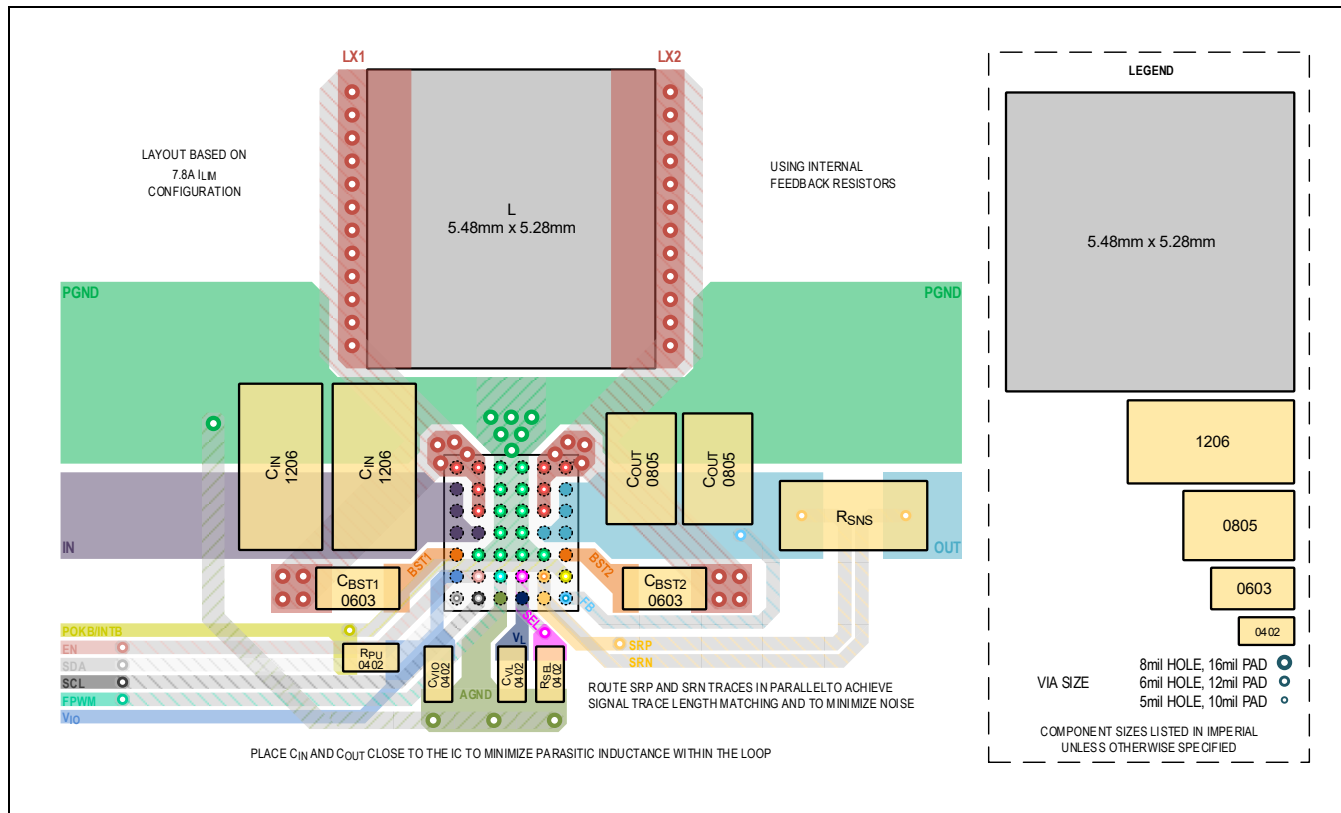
PCB Layout Recommendation for 42 WLP Package with 5.48mm x 5.28mm Inductor
